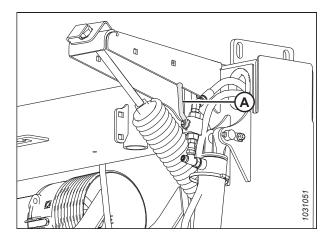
Cylinder Lock-Out Valve – Open Position
